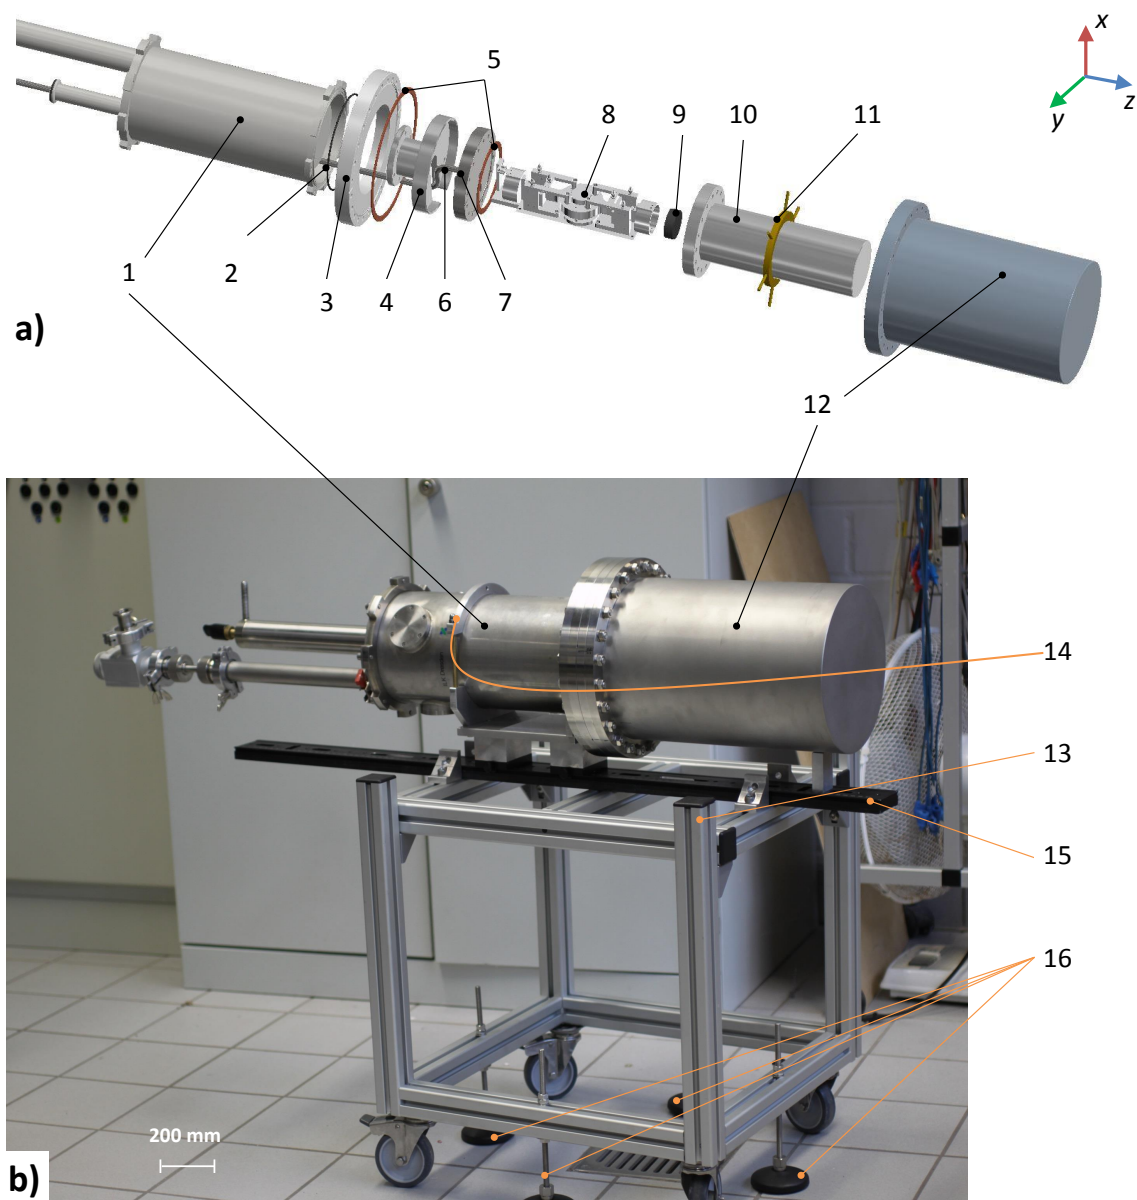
a) The exploded CAD model of the Super-LOFOS comprised of (1) cooling cryostat, (2) Viton[®] O-ring, (3) flange adapter, (4) aluminum thermal link, (5) copper seals, (6) He-line, (7) blind flange (8) sTFMS, (9) bulk HTS, (10) cryogenic force cell, (11) mechanical support and (12) outer vacuum vessel. b) Photograph of the assembled Super-LOFOS, which is fixed to the (13) transport table with (16) four swivel feet and fastened with the (14) security clamp and is firmly fixed to an (15) optical slab.
